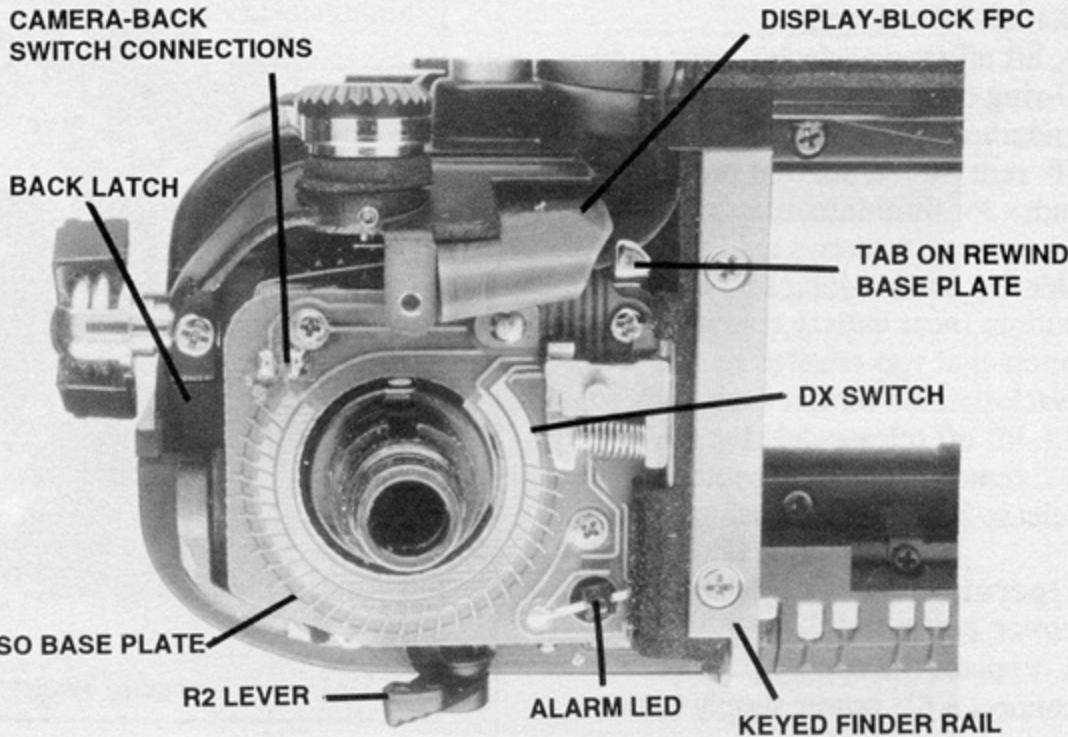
REWIND-SIDE TOP COVER REMOVED
